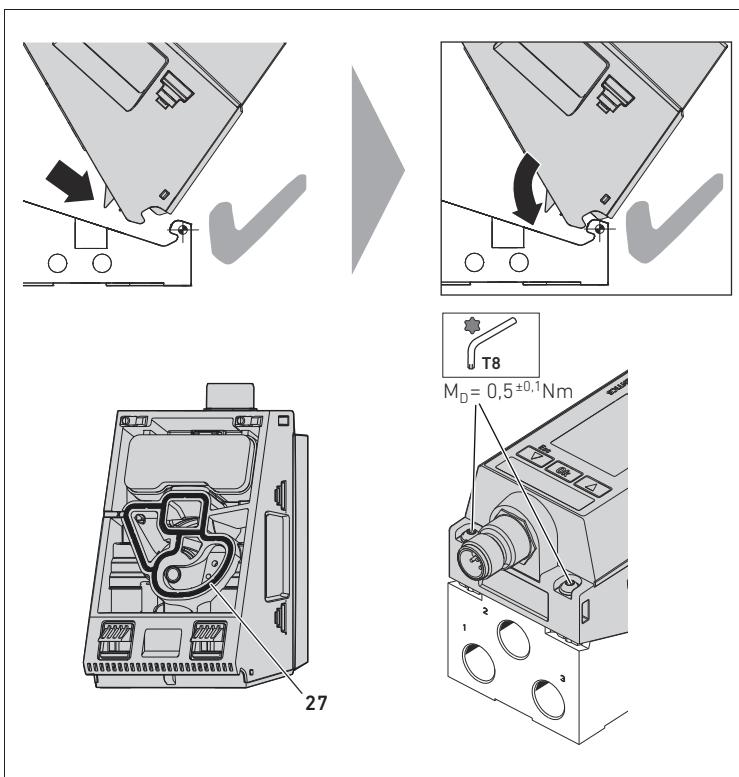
Assembling the EV03 pressure regulator on a base plate
